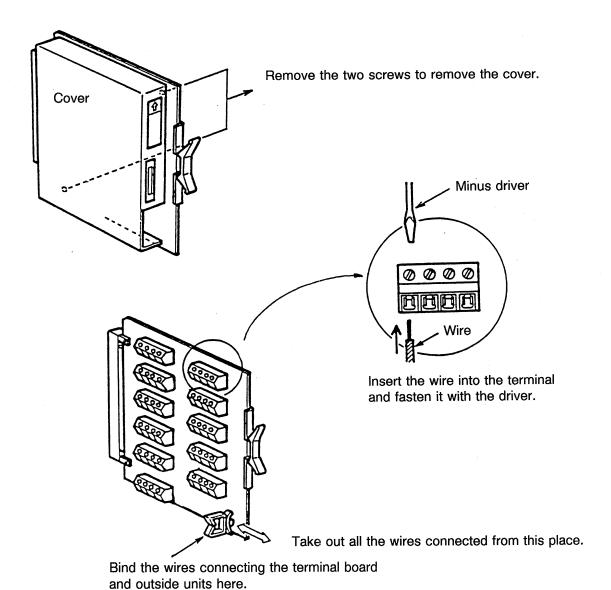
Removing the Terminal Board Cover and Terminal Board Wiring
